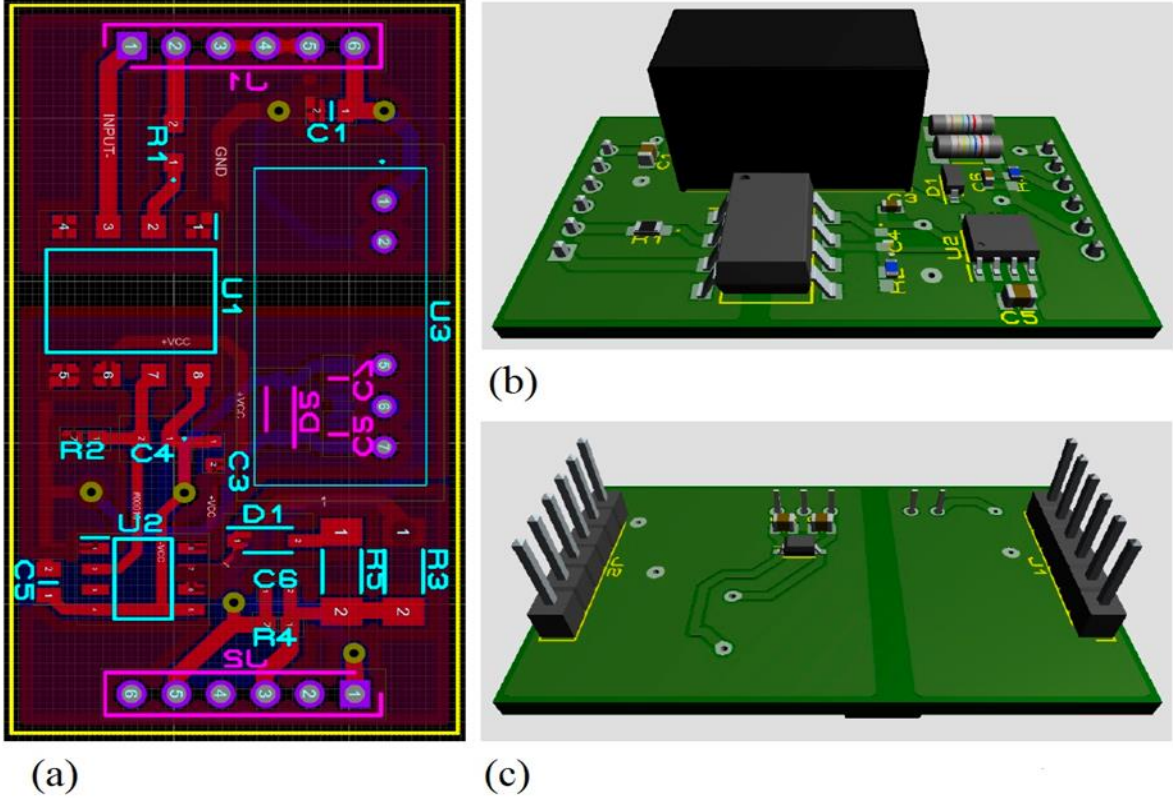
(a) PCB board for the gate driver circuit. (b) 3D of the top-view. (c) 3D of the bottom view [3].
